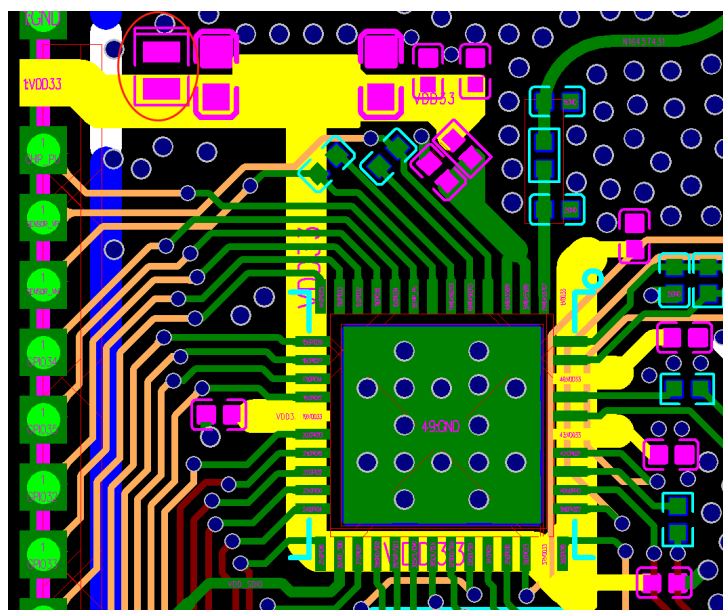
ESP32 Power Traces in a Four-Layer PCB Design
